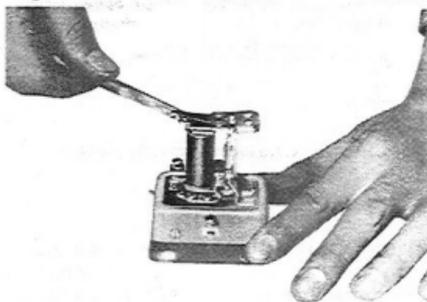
Adjusting Regulator Adjusting Arm W5526
